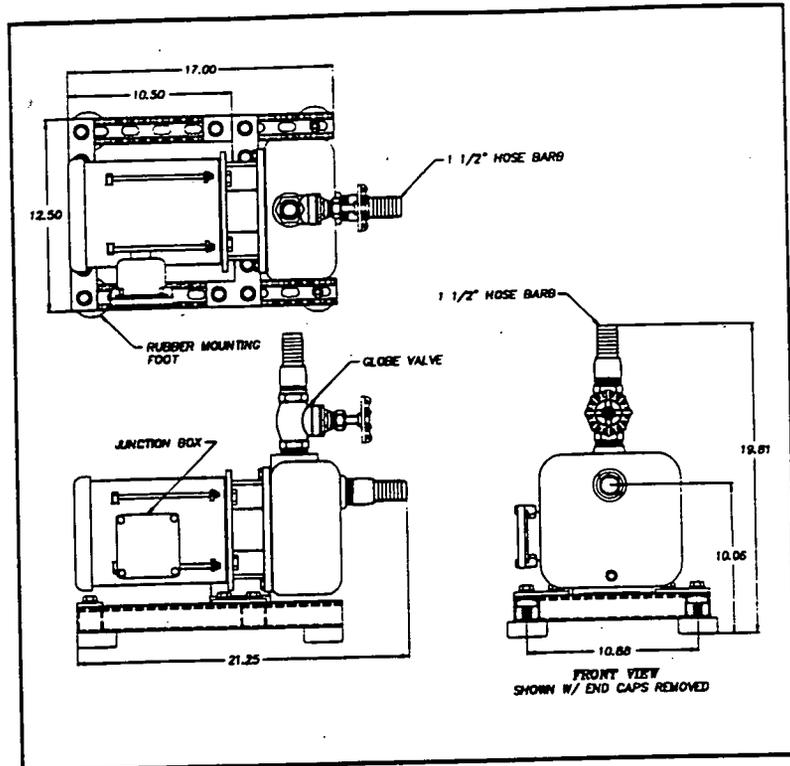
Surface Mounted Water Table Depression Pump showing optional globe valve and hose bars.
